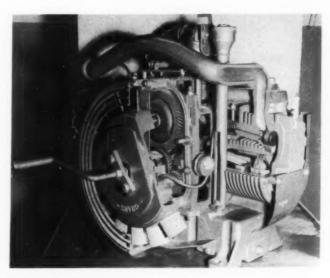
Right-Small aircooled engines are ready-torun units incorporating all components necessary to operation. This cutaway view of a typical single-cylinder, air-cooled four-cycle gaso-line engine shows L-head valve arrangement and cooling fins. Developing a maximum of 6.2 hp at 3600 rpm, the engine weighs 76 lb and is 201/8 inches wide across muffler and gas tank, 19 inches from bottom of base to top of tank filler cap and 14 19/32 inches from end of crankshaft extension to rope starter sheave
